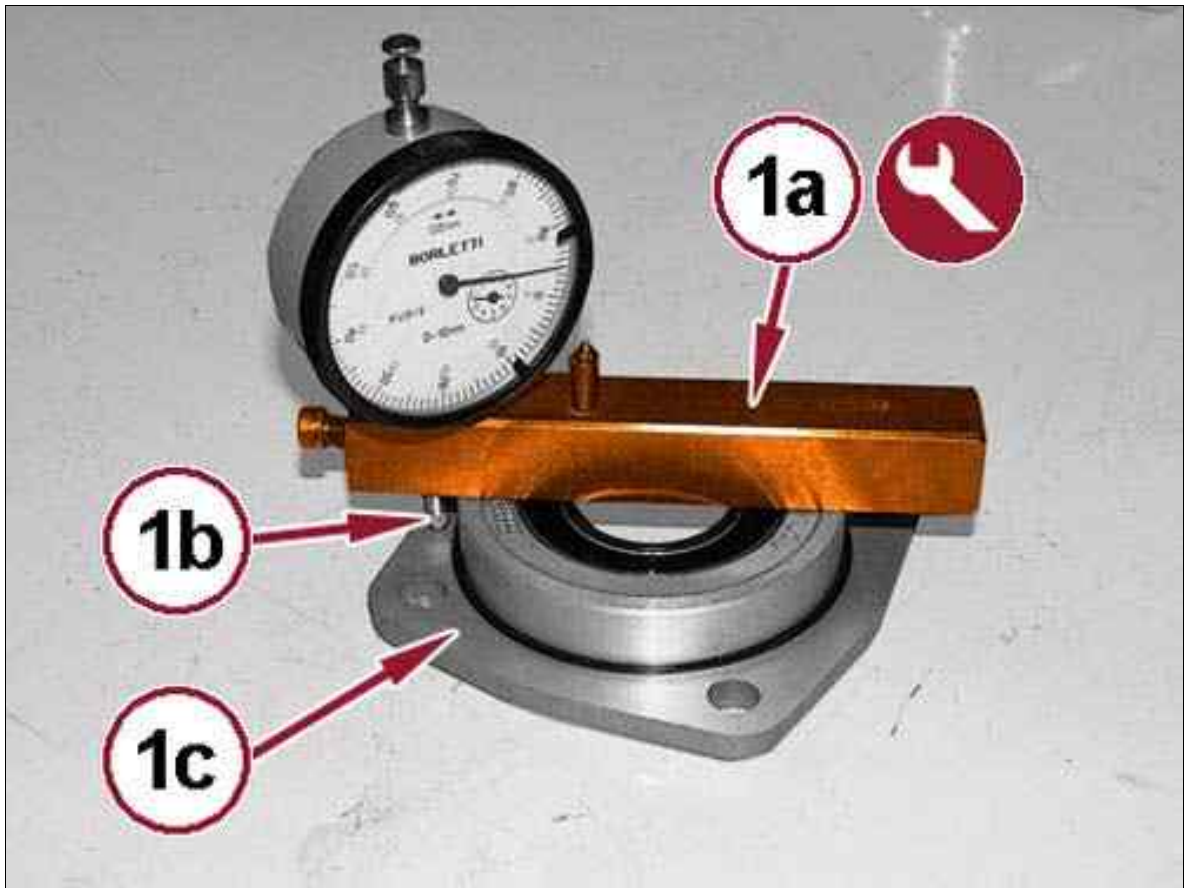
Plunger, Taper Roller Bearing Outer Race & Special Tools
